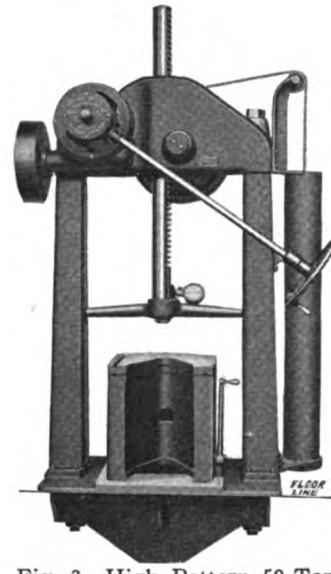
High Pattern 50-Ton (45t.) Press, Belt Drive With base below floor. Ram is counterweighted. All types of presses can be equipped with a pressure-holding attachment.
